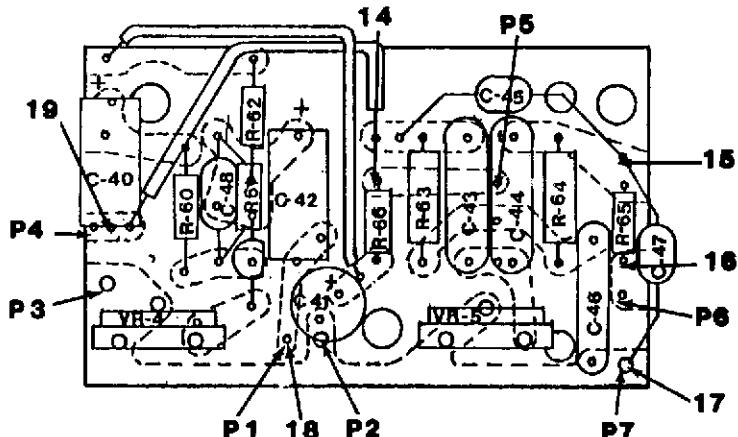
2220L 5K Hz. (Driver Training) Filter Board
